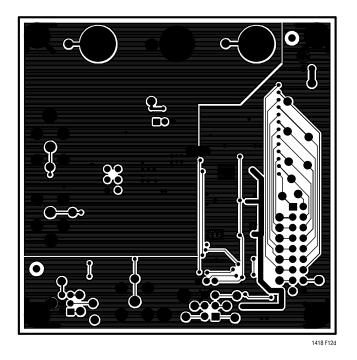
Suggested Evaluation Circuit Board—Solder Side Layout
